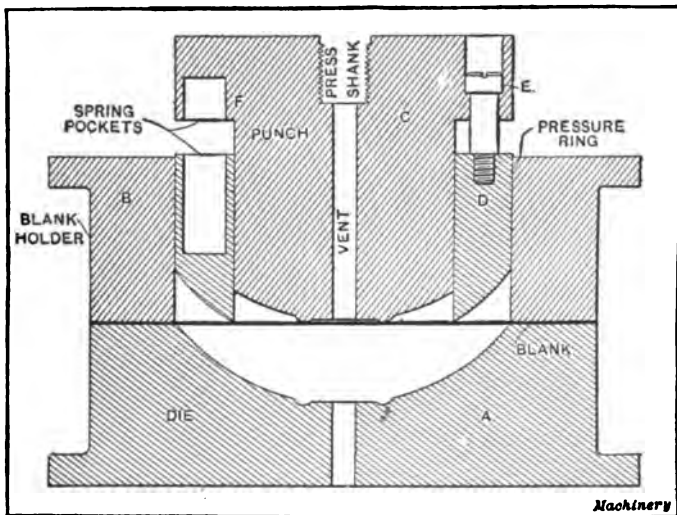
Cover Blank Gripped by Blank-holder preparatory to the Drawing Operation
